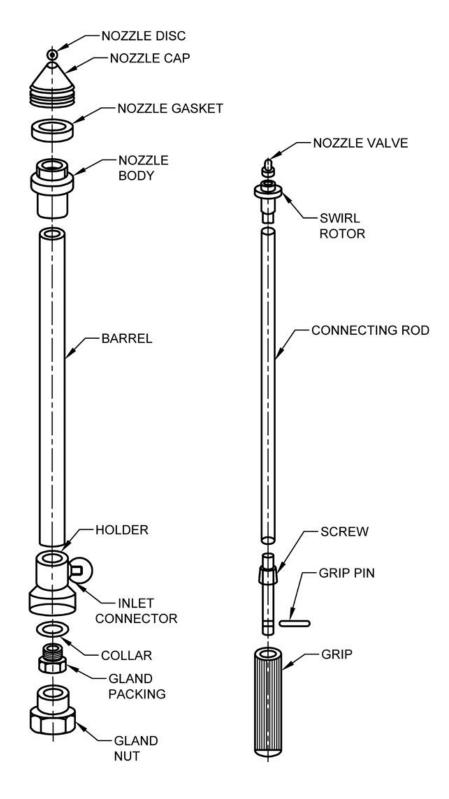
COMPONENTS OF SPRAY GUN (SCREW TYPE)
